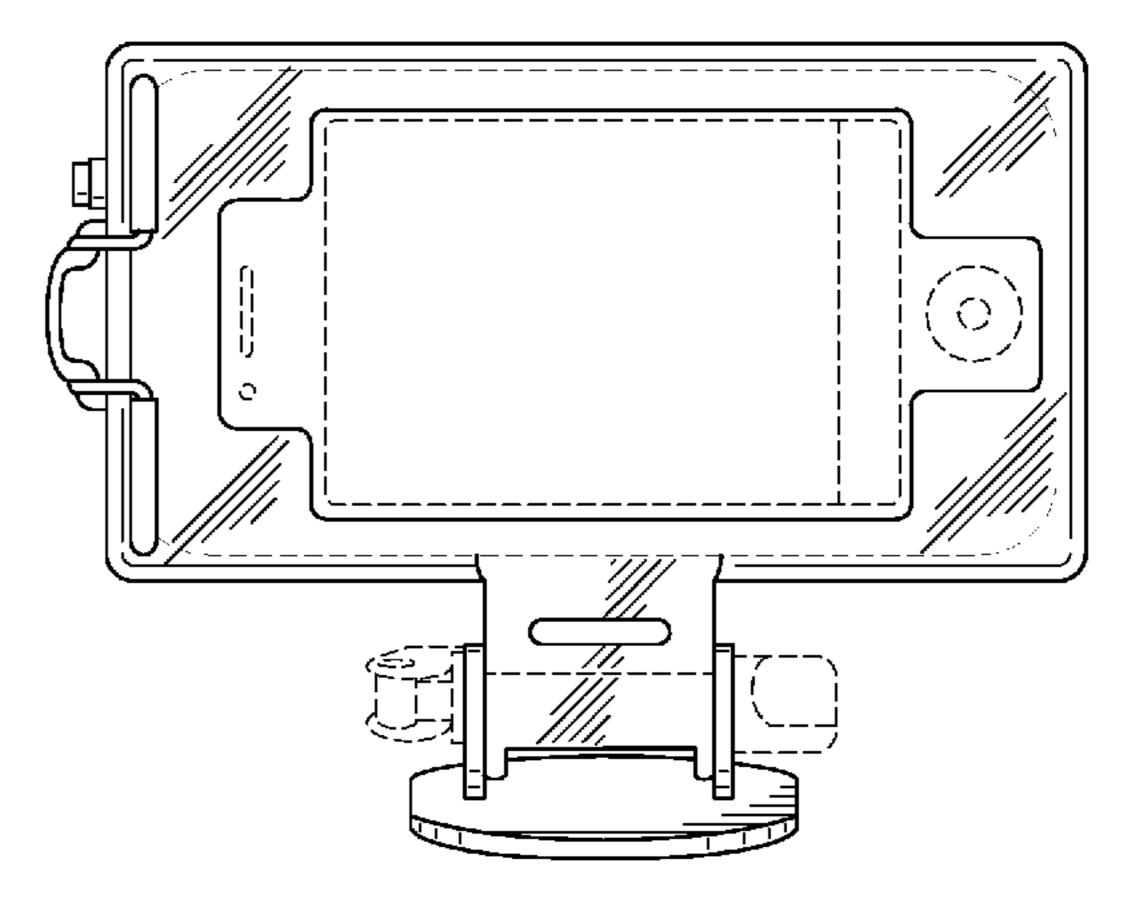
is a partial back view of FIG. 1; the hinge component of the casing and mounting assembly door positioned in a first unbarred state; and,
